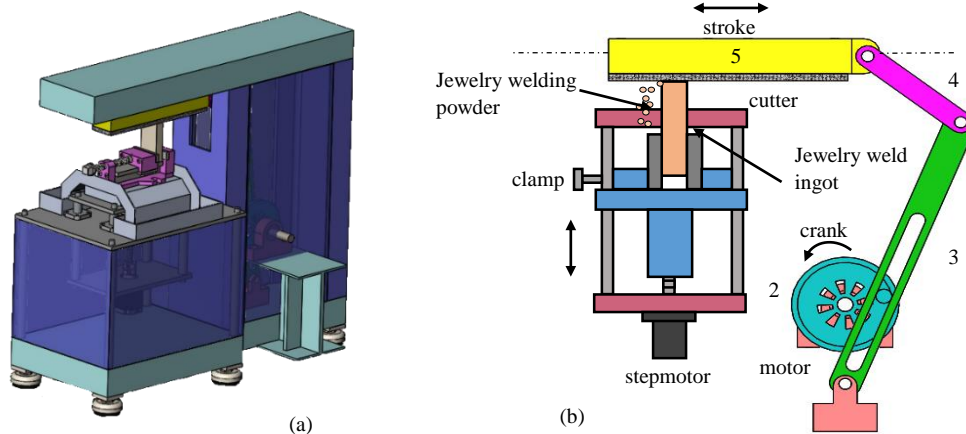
a) Jewelry welding powder production machine design, b) Quick-return mechanism of the machine
